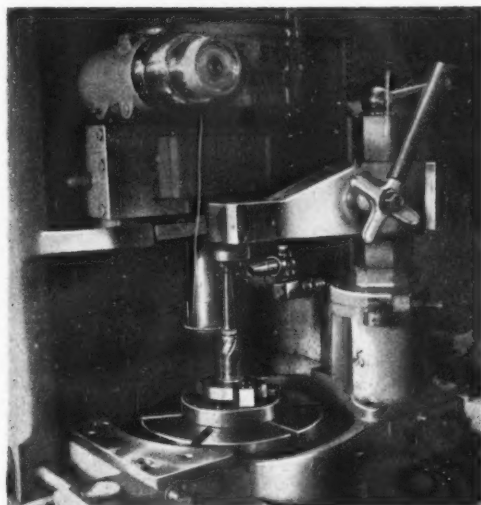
Set-up on a Sykes V10A Gear Generating Machine for Cutting Serrations on the Crankshaft
